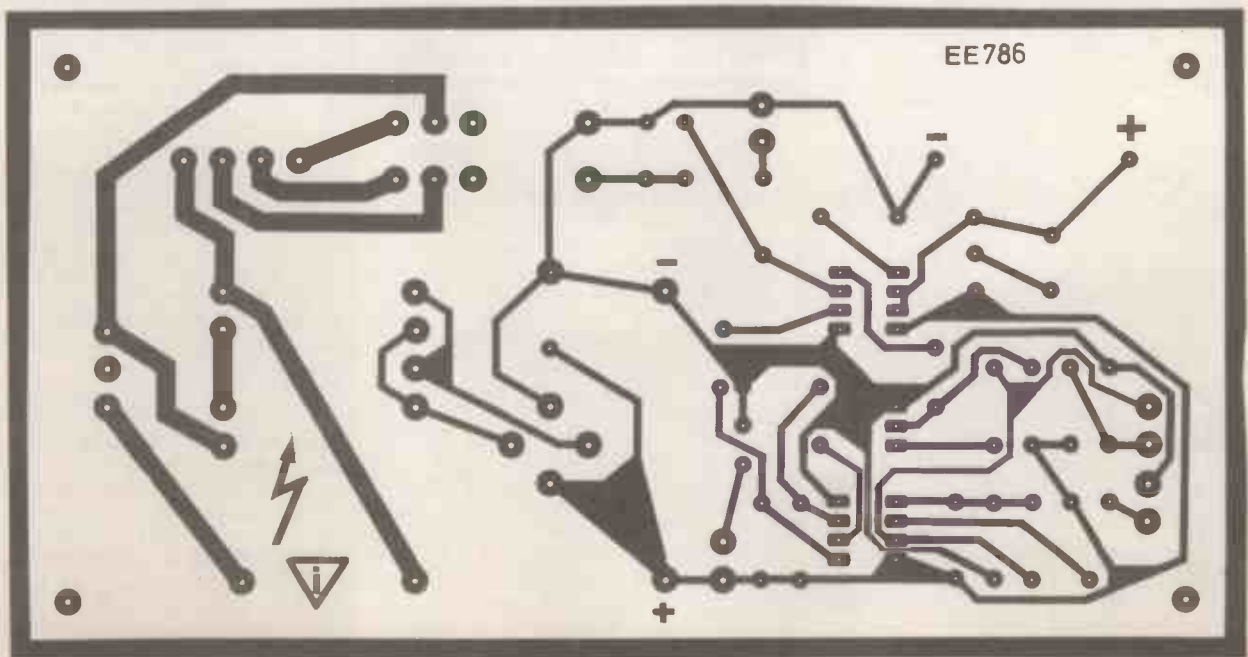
Printed circuit board component layout and full size copper foil master pattern.
